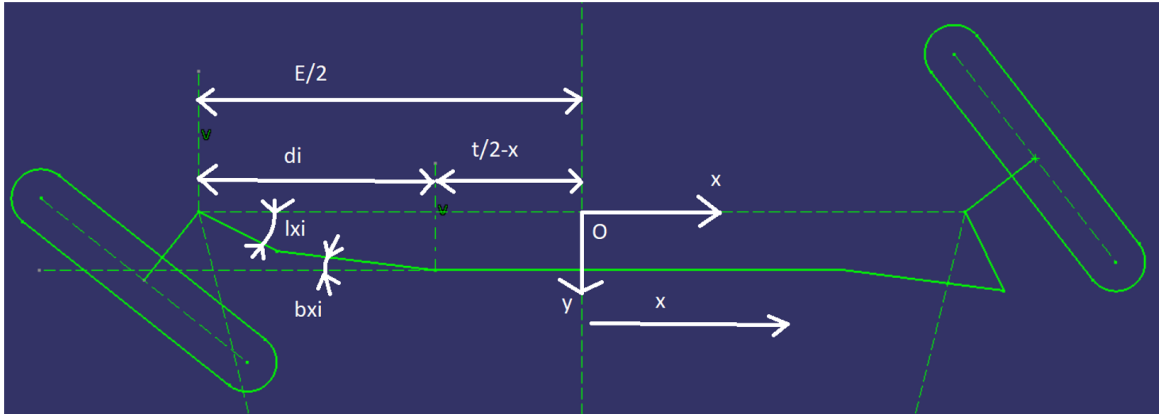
Top view of the steering linkage for finding the turn angle of the inner wheel
